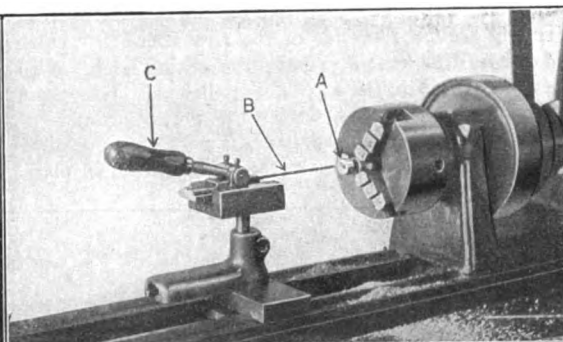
HOLLOW MILL AND QUICK-ACTING WORK HOLDER FOR THE LATHE
